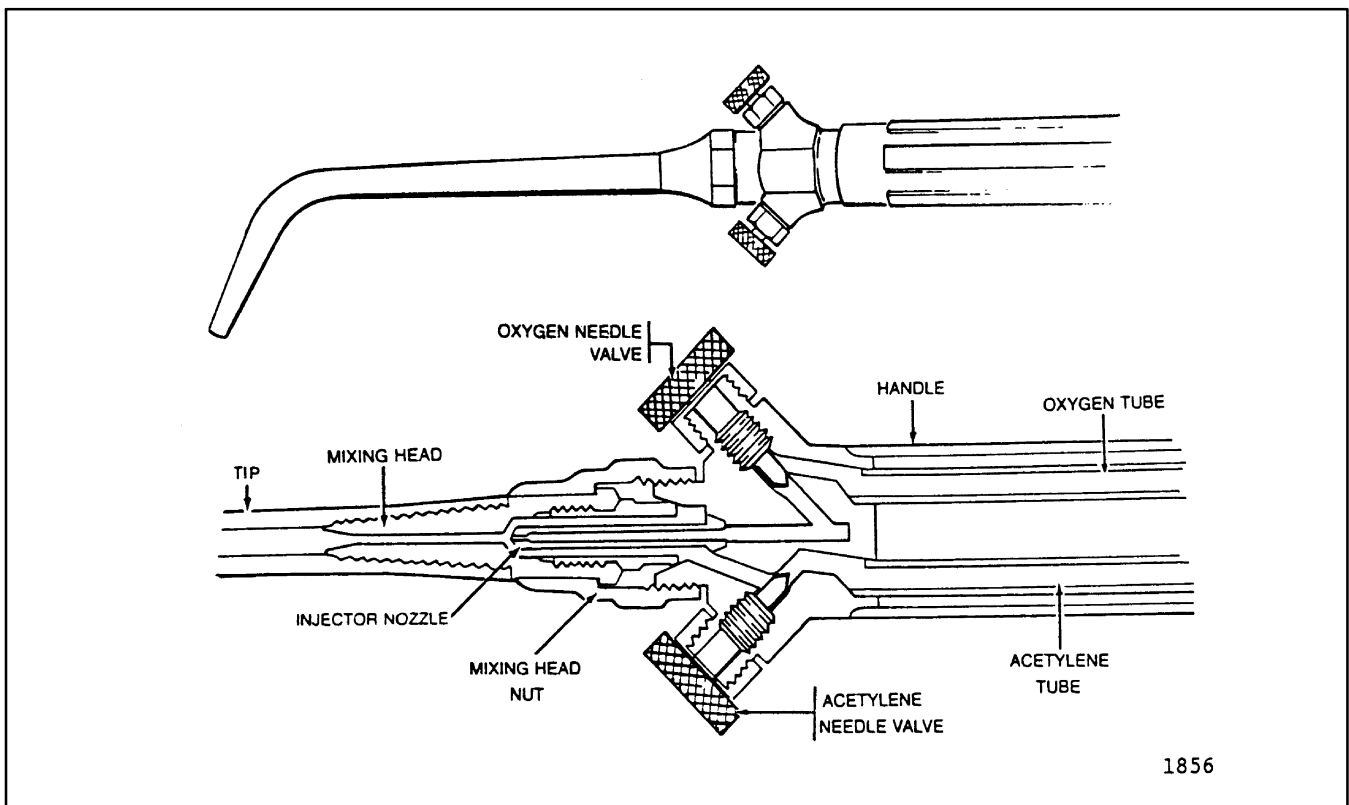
Mixing Head for Injector Type Welding Torch
